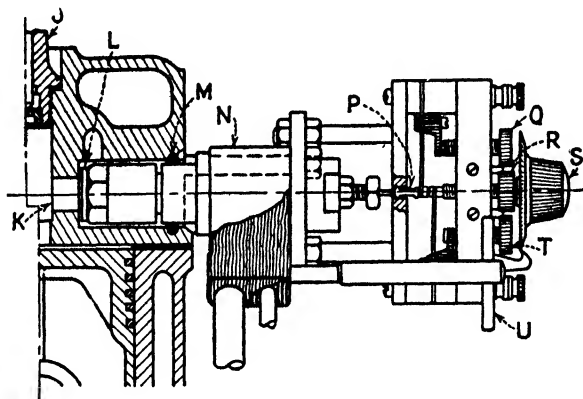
B.—SECTION THROUGH ONE-HALF OF CFR-ENGINE COMBUSTION CHAMBER.
